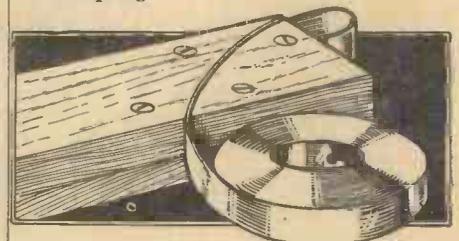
A simple device which enables one to get to the centre of a spring.
